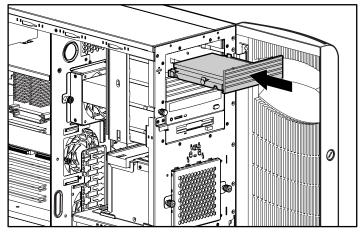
Installing a device mounted inside a 5.25-inch drive adapter
